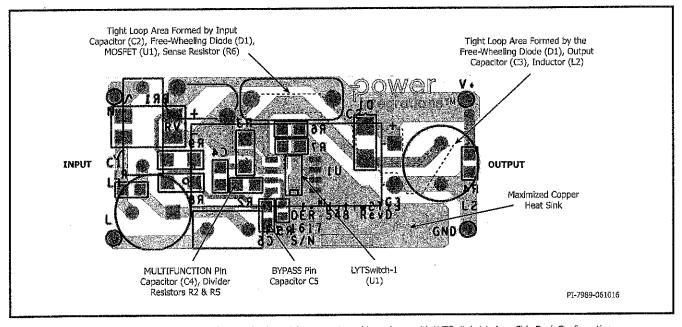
Design Example DER-548 PCB Layout Showing the Critical Components and Loop Areas with LYTSwitch-1 in Low-Side Buck Configuration.
